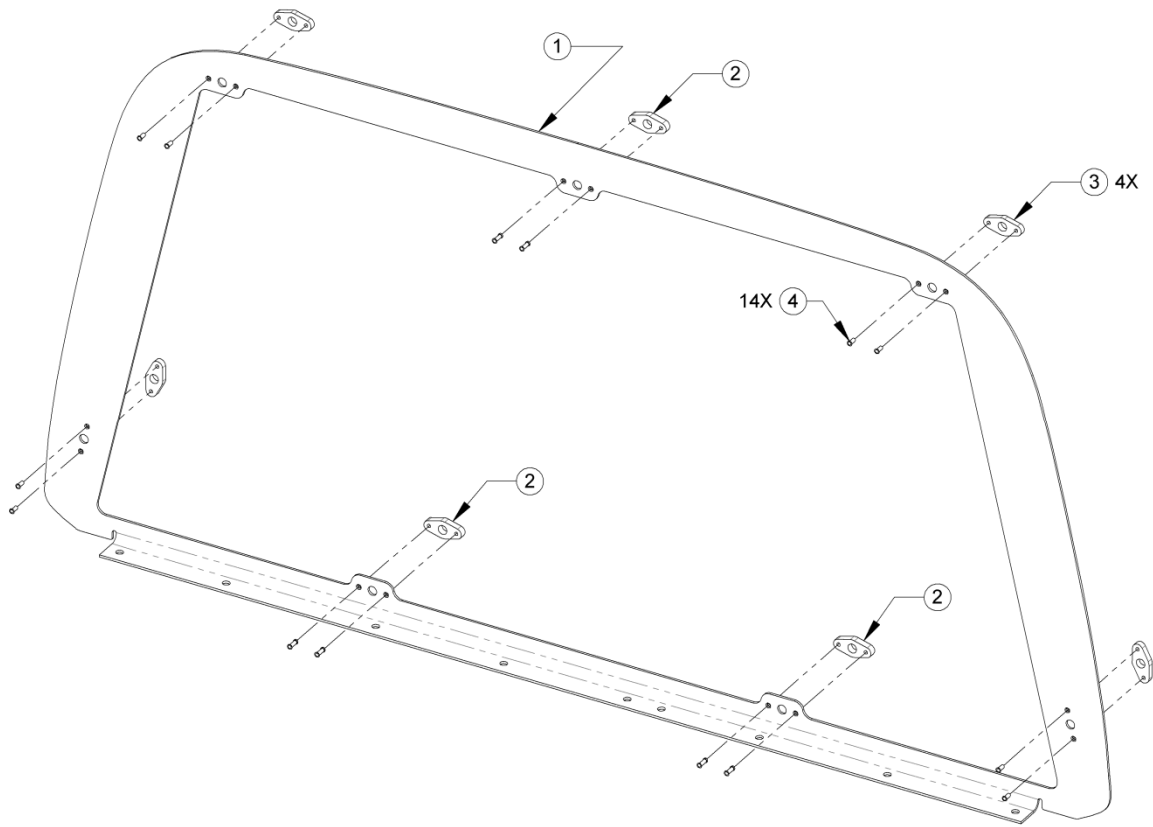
Adapter Frame, Floor & Closeout Angle Installation
